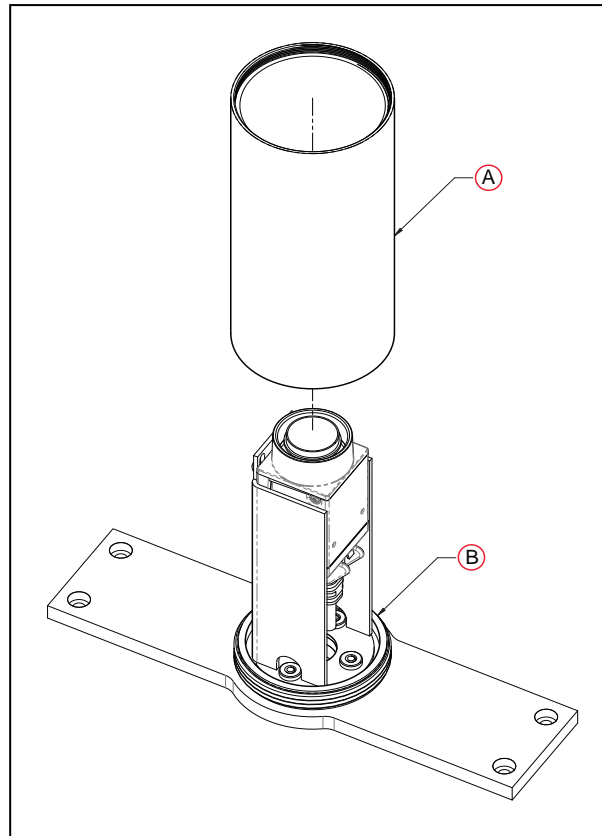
Attaching the Tube to the Base, (A) Tube, and (B) Camera Enclosure Base
